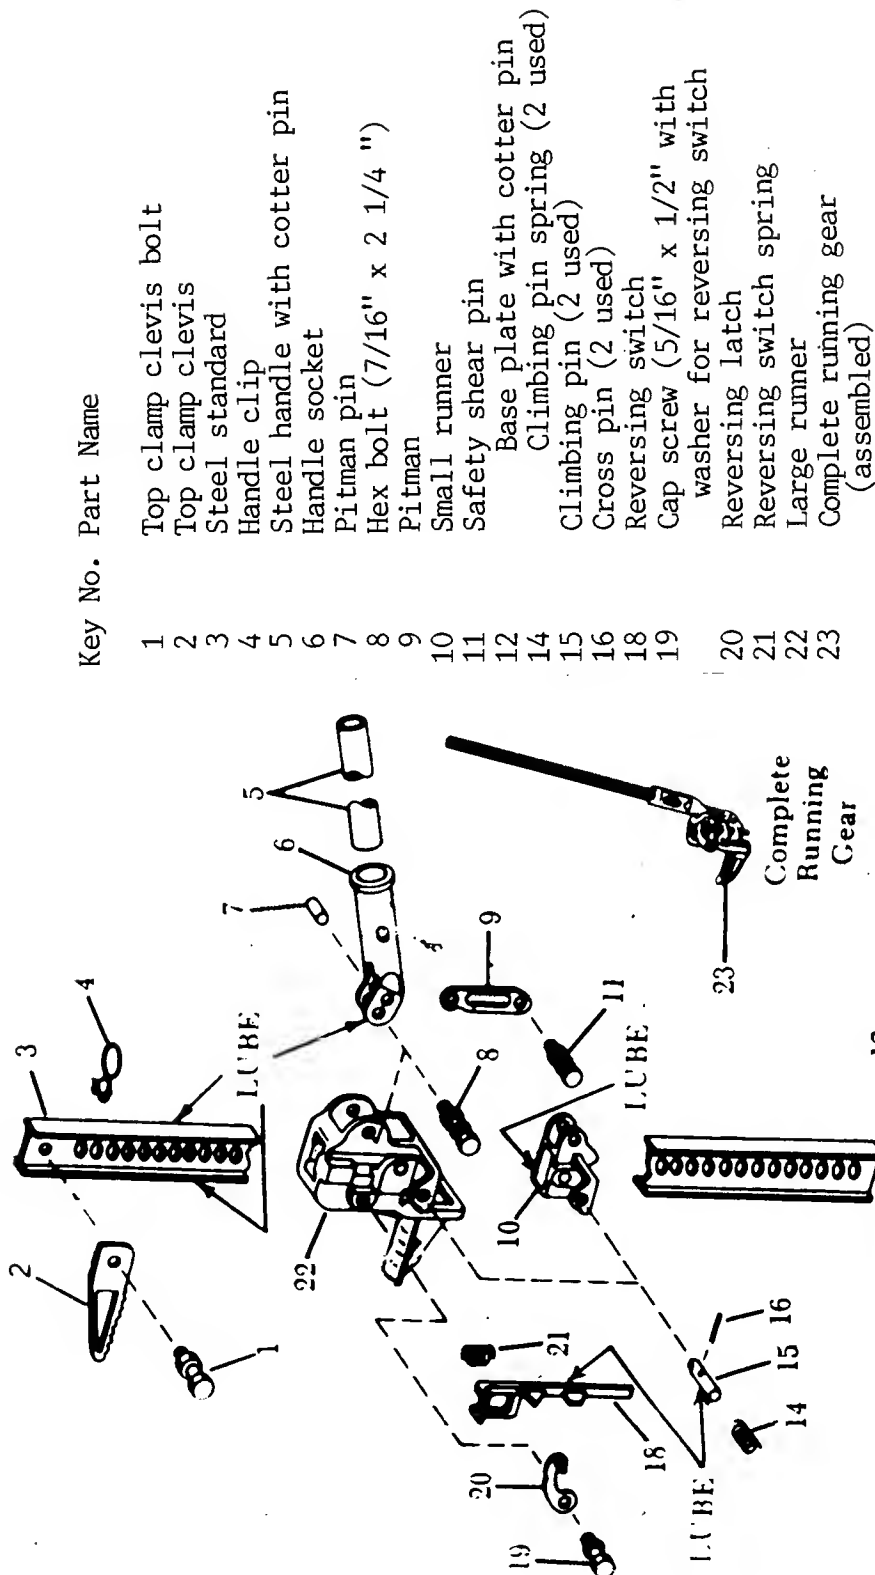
(page 4 of 4): Exploded view of jack (enlarged) with identifying parts list (retyped for clarity) on back side of Operating Instructions allegedly supplied with the jack.
